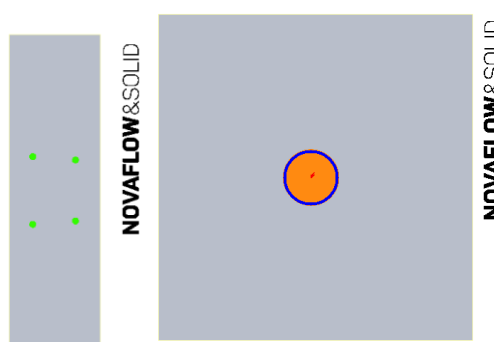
End of model where the pressure chamber and cooling channels go into the mold
